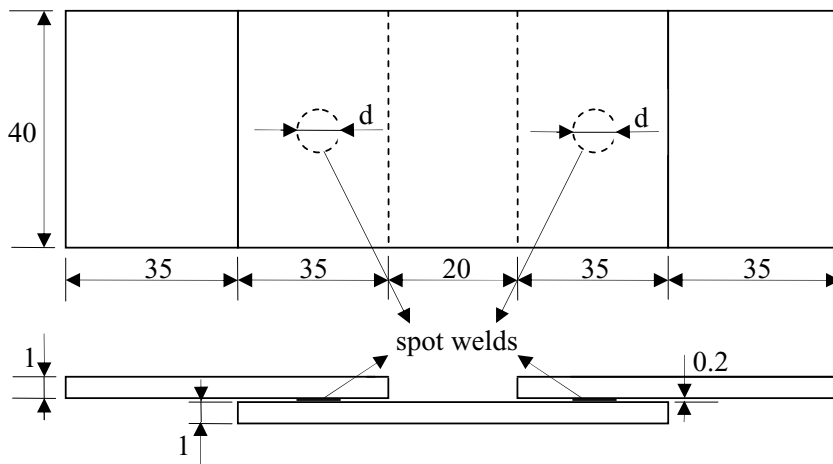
Geometry of the tensile shear (TS) specimens (bottom and side views).
